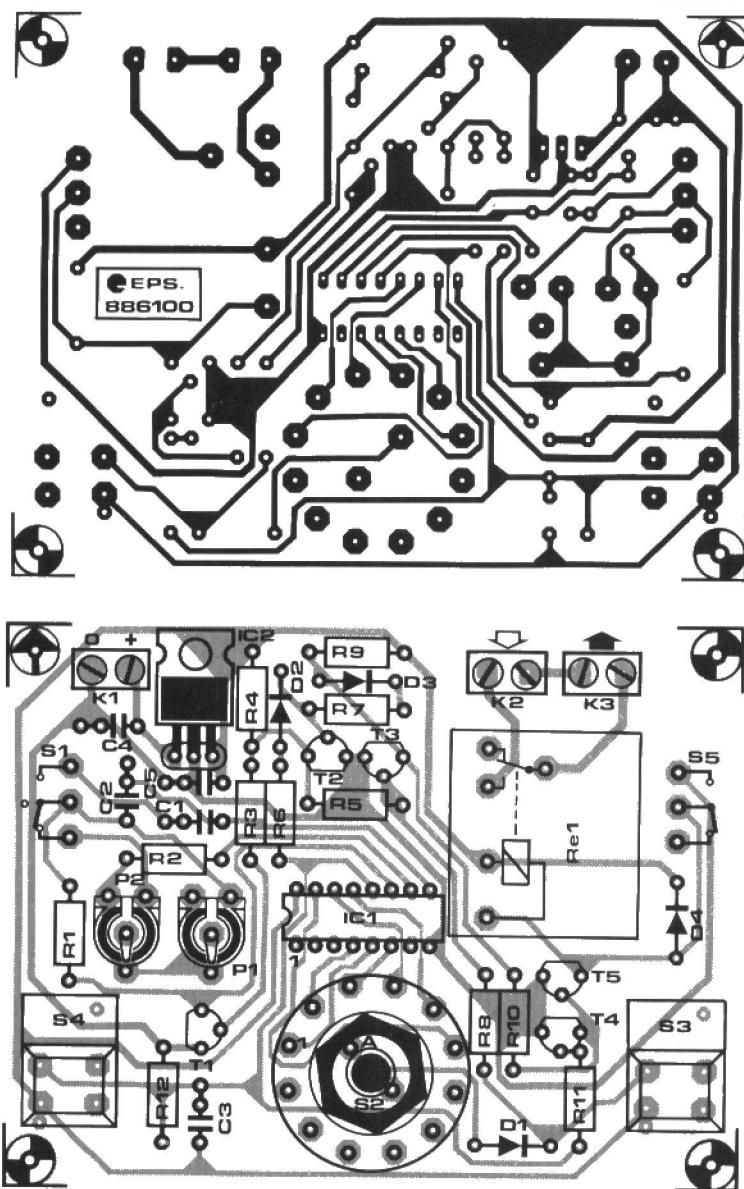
Track layout and component mounting plan of the printed-circuit board.
